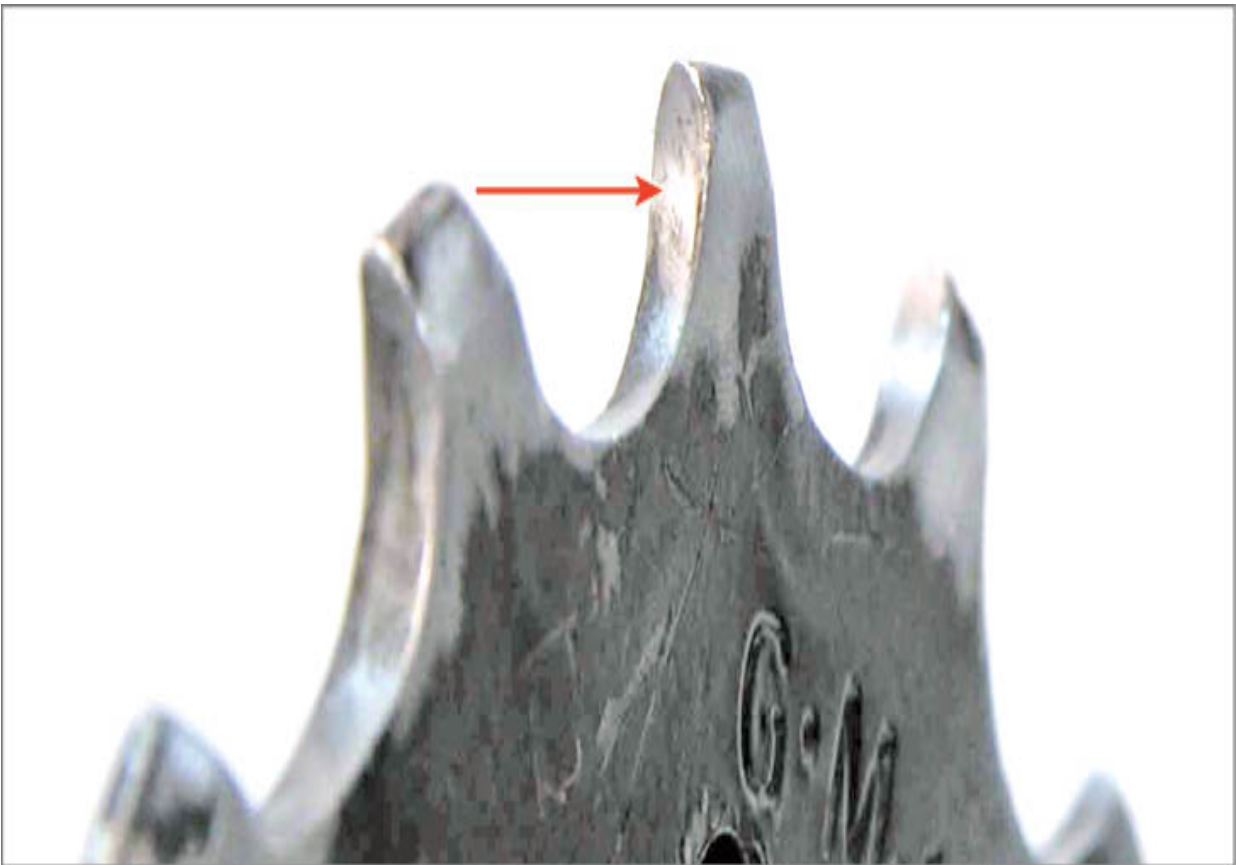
Inspect for a smooth and shiny surface indicating a worn sprocket tooth
